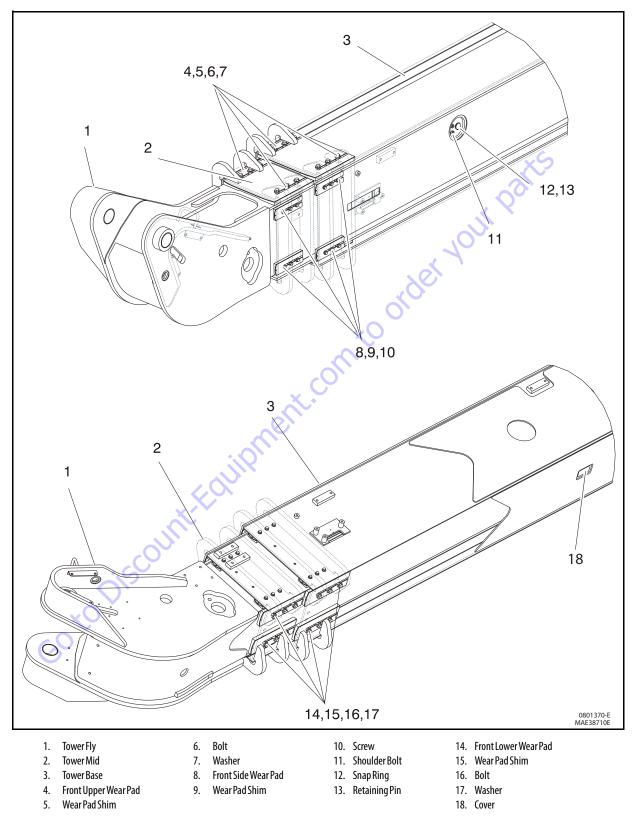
Tower Boom Assembly - Sheet 2 of 3
